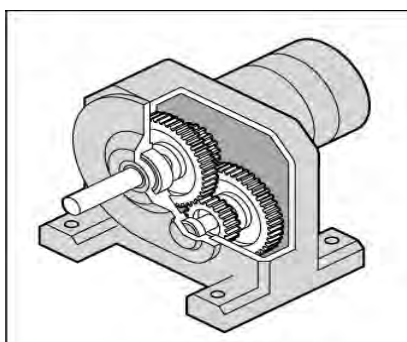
Cut-away view of a fixed physical barrier encasing the gear assembly and electric motor
